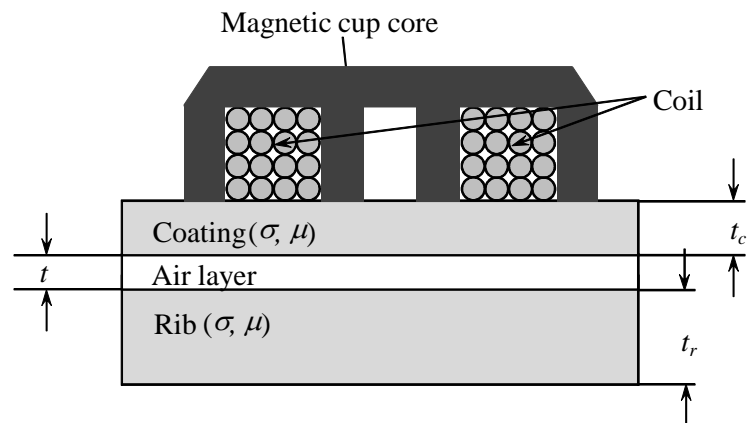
Eddy current cup core coil sensor placed on the inspected multilayered assembly.
